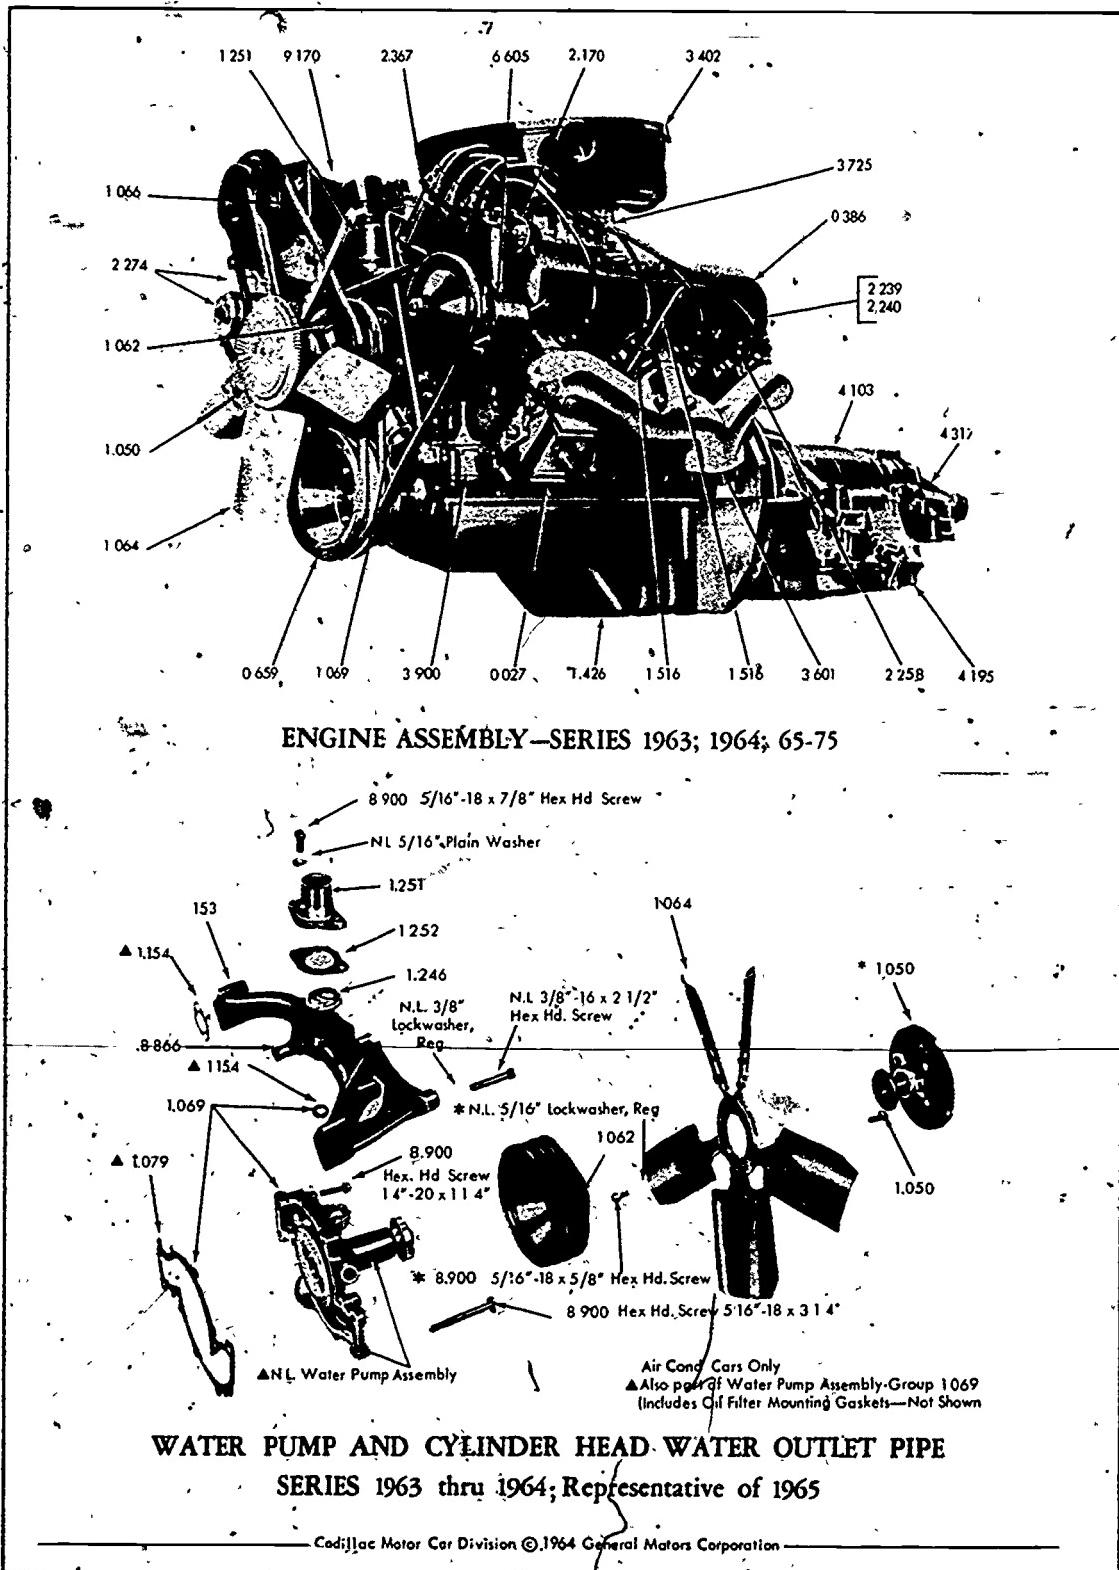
Specimen page of Cadillac parts catalog that illustrates engine assembly
